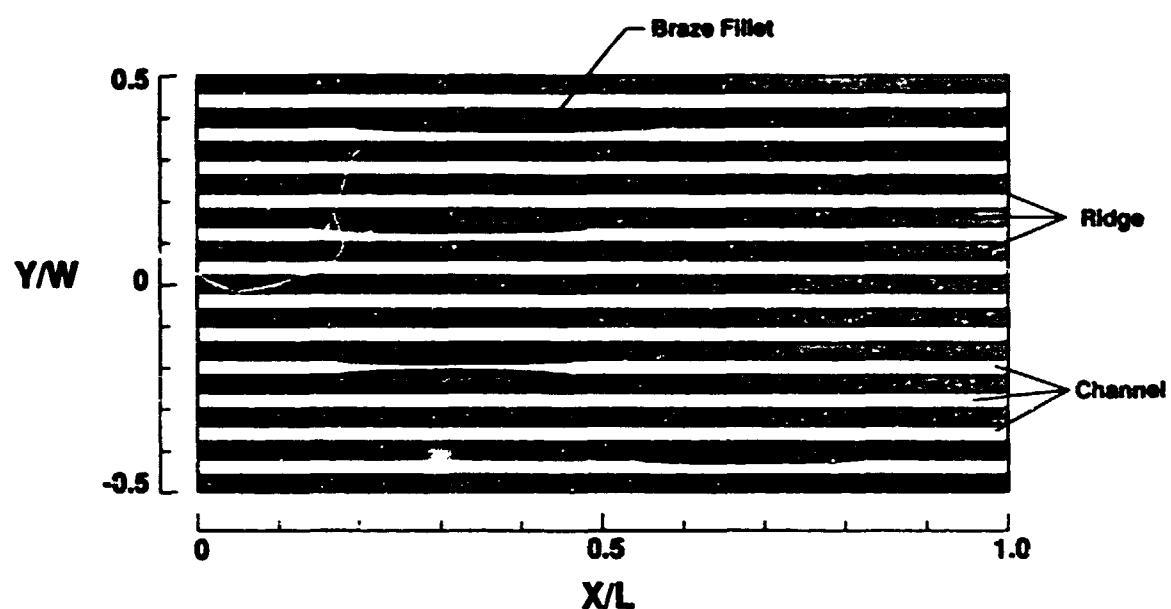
Top view of channel specimen showing locations of blockage in flow channels due to braze fillets.
